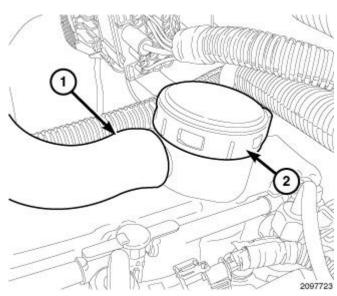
Oil Separator Cover Courtesy of CHRYSLER LLC
